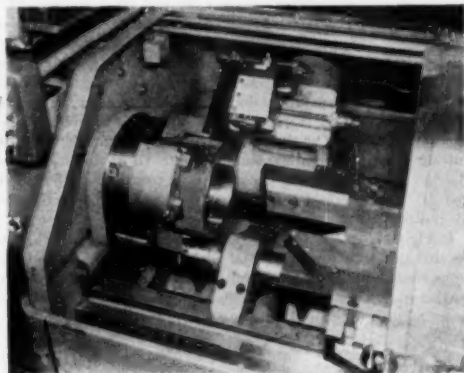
BORING AND FACING OF BEARING FORGING SHOWING SPLASH GUARD WITHDRAWN
